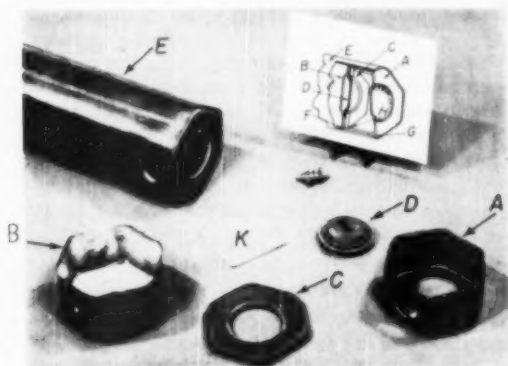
Parts of M-69 Incendiary Bomb, and Sketch of Brazed Assembly
